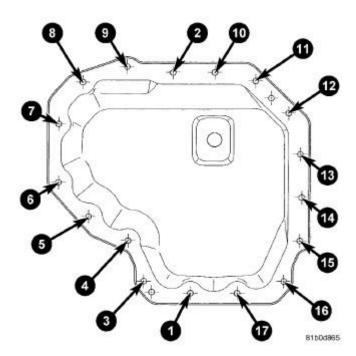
Lower Oil Pan Bolts Tightening Sequence Courtesy of CHRYSLER LLC
